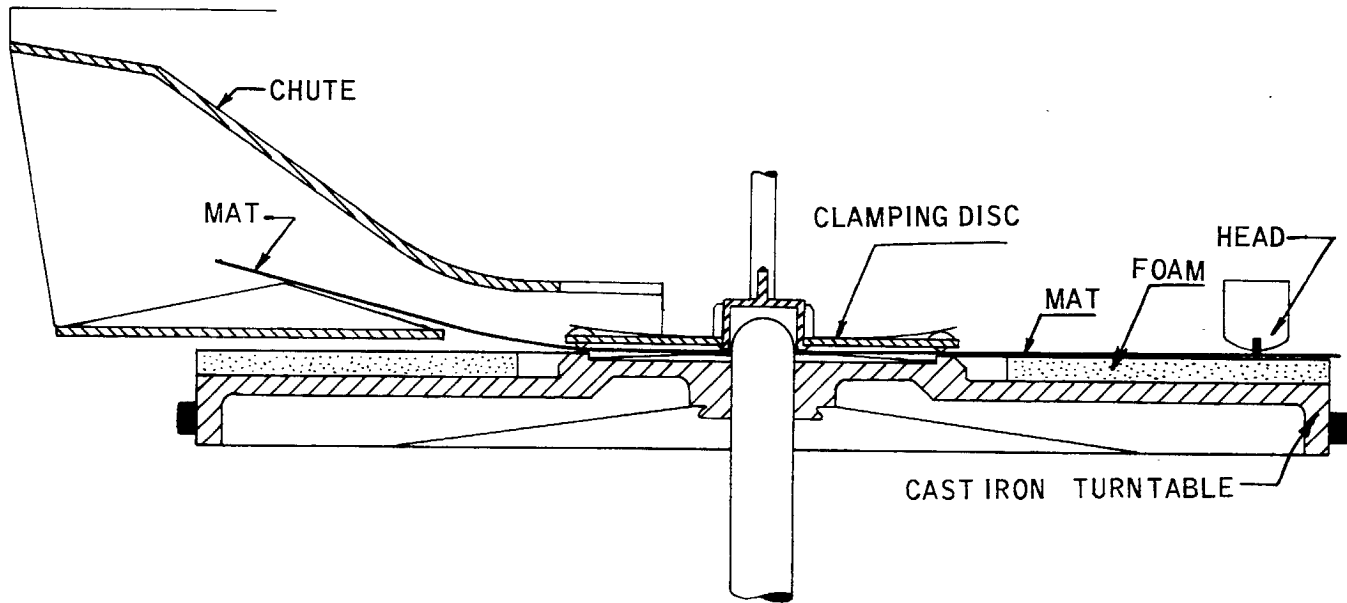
SECTIONAL VIEW SHOWING POSITION OF MAT AND HEAD IN PLAY MODE
